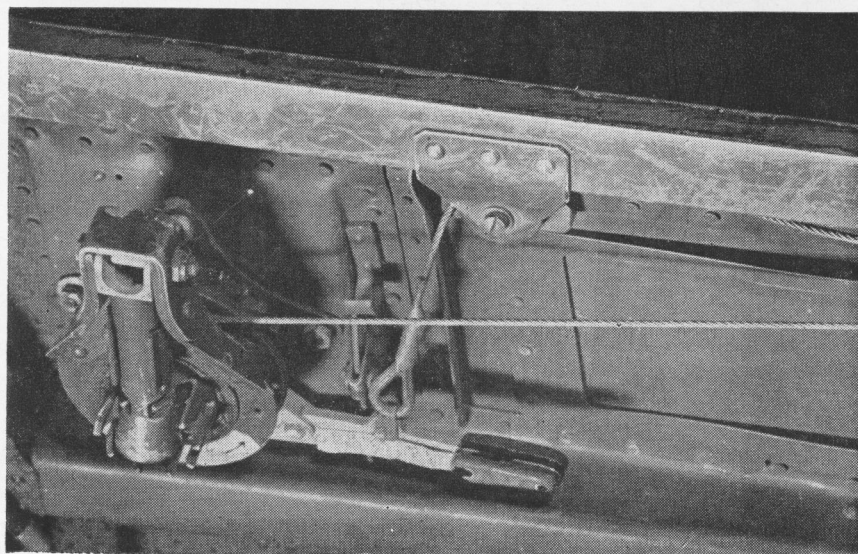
Arrestor gear operating crank and ratchet, shown in closed and locked position in the photograph, with a clip spring holding the handle in locked position. With handle extended to operating position the sketch shows the radial ratchet which forms a nut to hold the pulley and ratchet in place.
